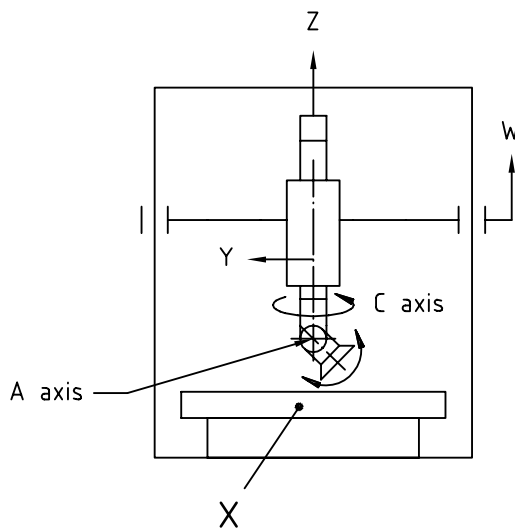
Type 4: Machine with one milling head on the cross-rail swivelling on axes C and A
